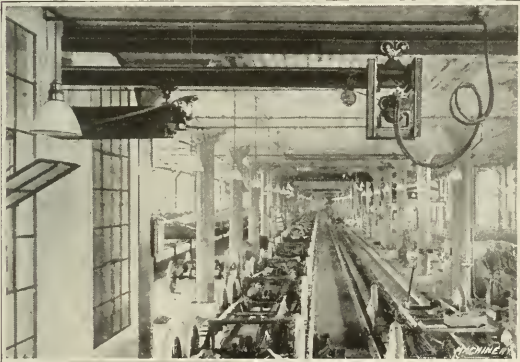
In the trolley rail extension (Fig. 36), the air cylinder actuates the hoist and the pneumatic motor runs the extension out so that the hoist can pick up its load and carry it back into the shop, where the auto body is put on a conveyor and carried to the assembling department
